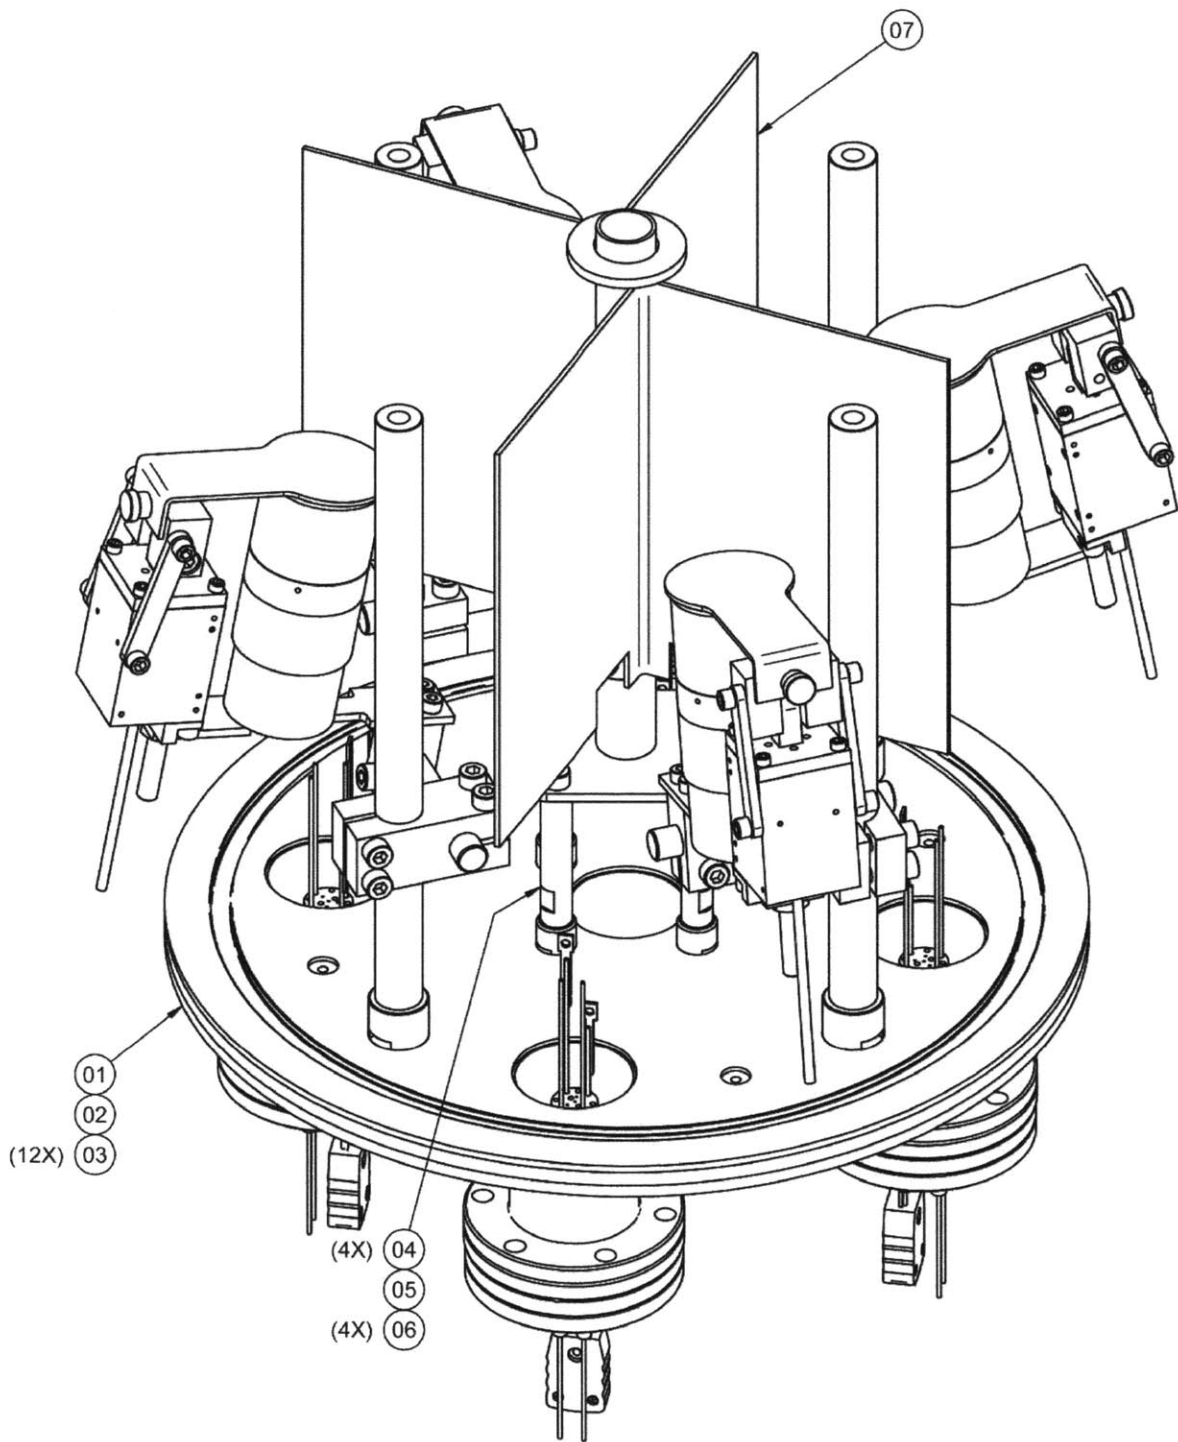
Engineering drawing of oCVD reactor bottom flange evaporation sources.
